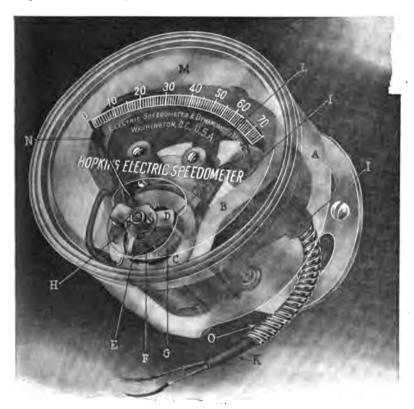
Internal Construction of d'Arsonval Electrical Voltmeter used with Hopkins Electric Tachometer.
